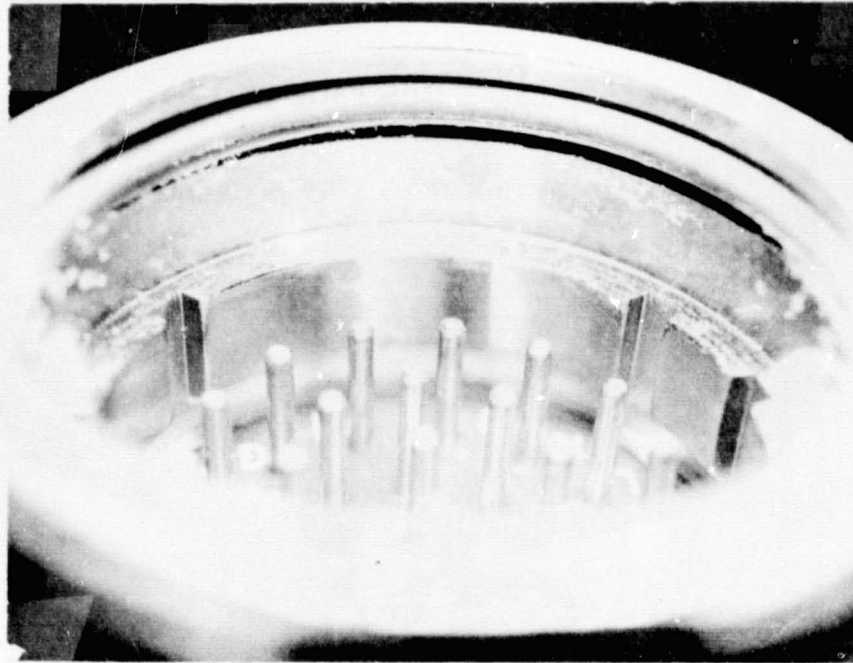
SRB watertight black box/ cable assembly No. 2 after ITB testing (inside view of connector).
